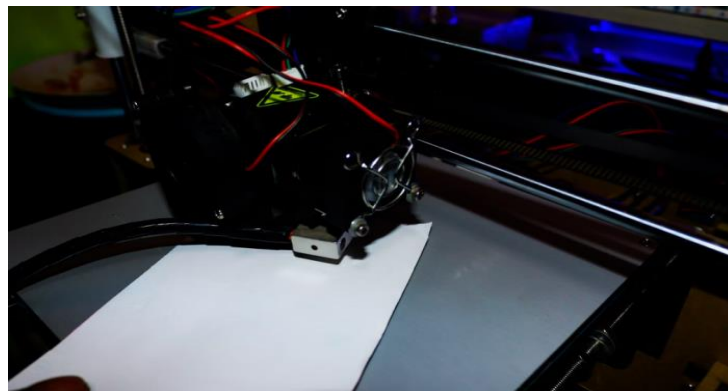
BED LEVELING USING A PIECE OF PAPER
